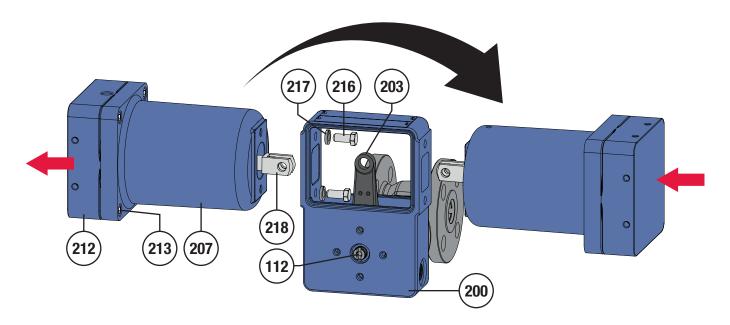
Spring Barrel Assembly Removal - Changing Actuator Action
